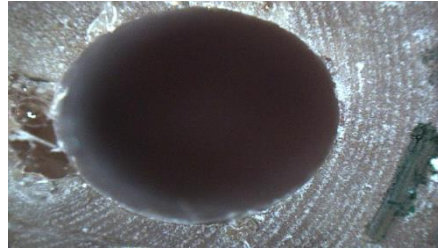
Machine Vision Image of Drilled Hole of the Hybrid Composite Specimen with 20 wt% &10 cm
